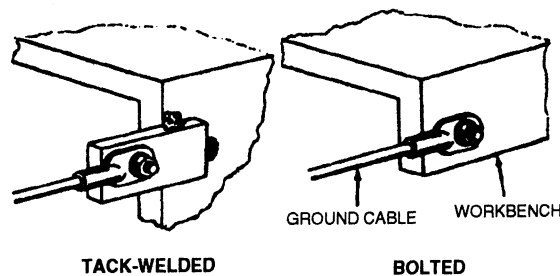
Bolted and tack-welded ground clamps.
